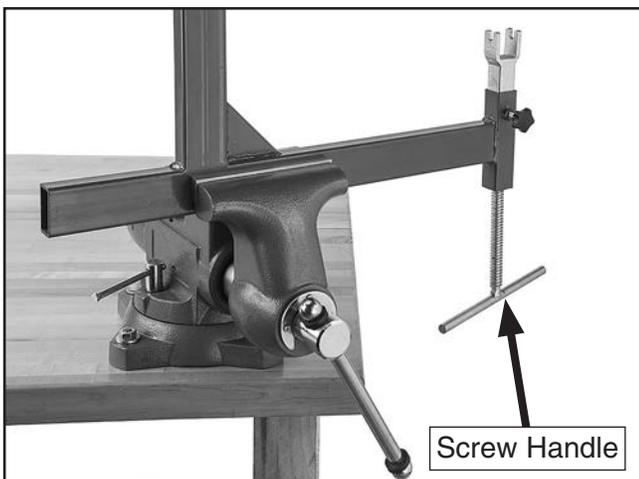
Adequate clearance to fully rotate adjustment screw handle.
